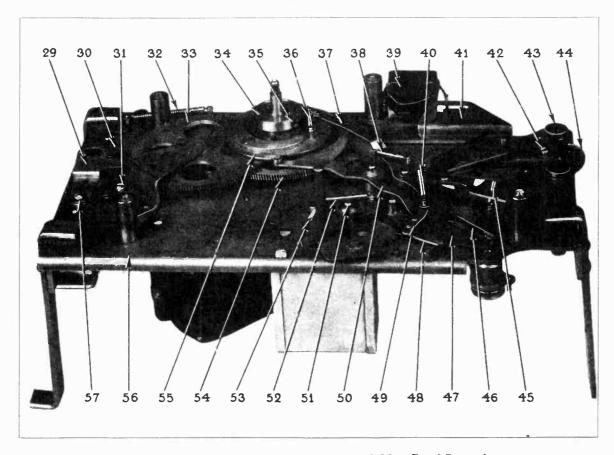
Top View of Automatic Mechanism with Motor Board Removed
